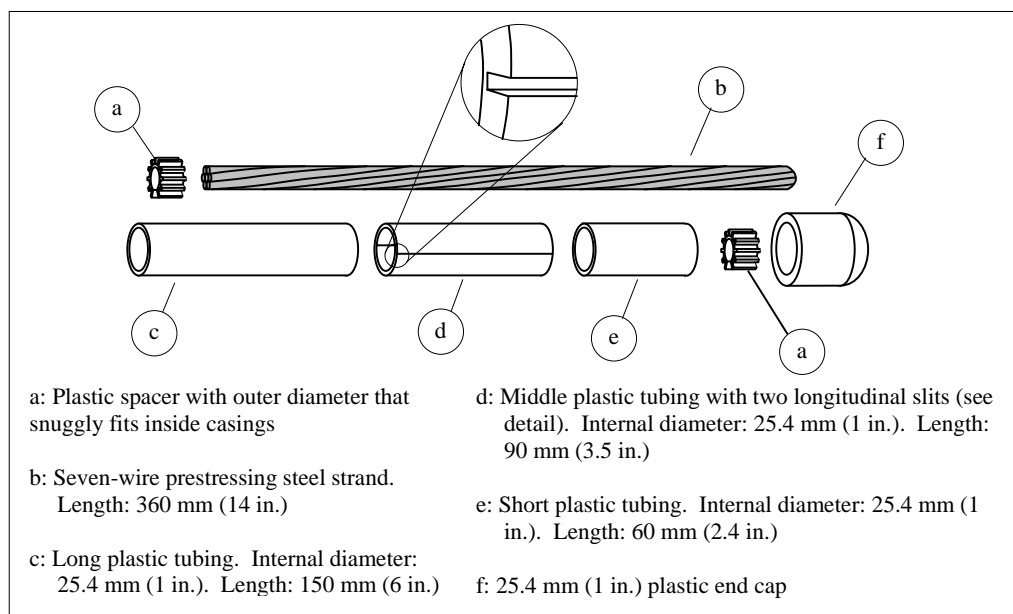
Specimen parts to prepare before casing assemblage and casting steps
